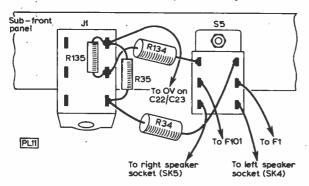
Wiring details of the headphone jack socket J1 and headphone loudspeaker switch S5. Further wiring details will be given next month.
